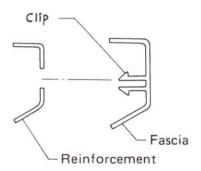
Bumper facia-to-reinforcement bar attachment (Sec 10)
